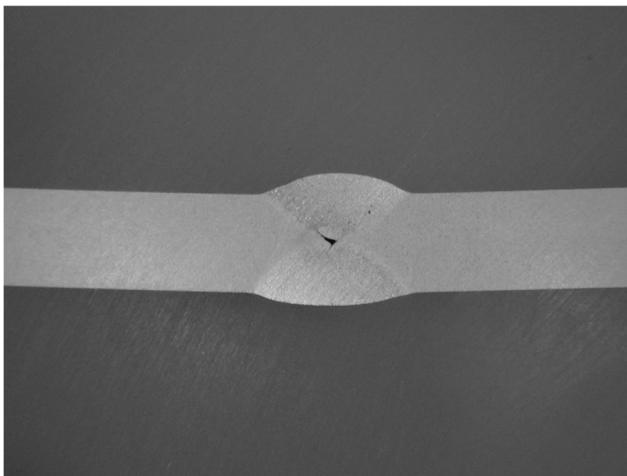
5083-H116 aluminum plate welded with ER5356 rod. Ground to 600 grit finish then etched with AWS D1.2 Basic Etchant.
